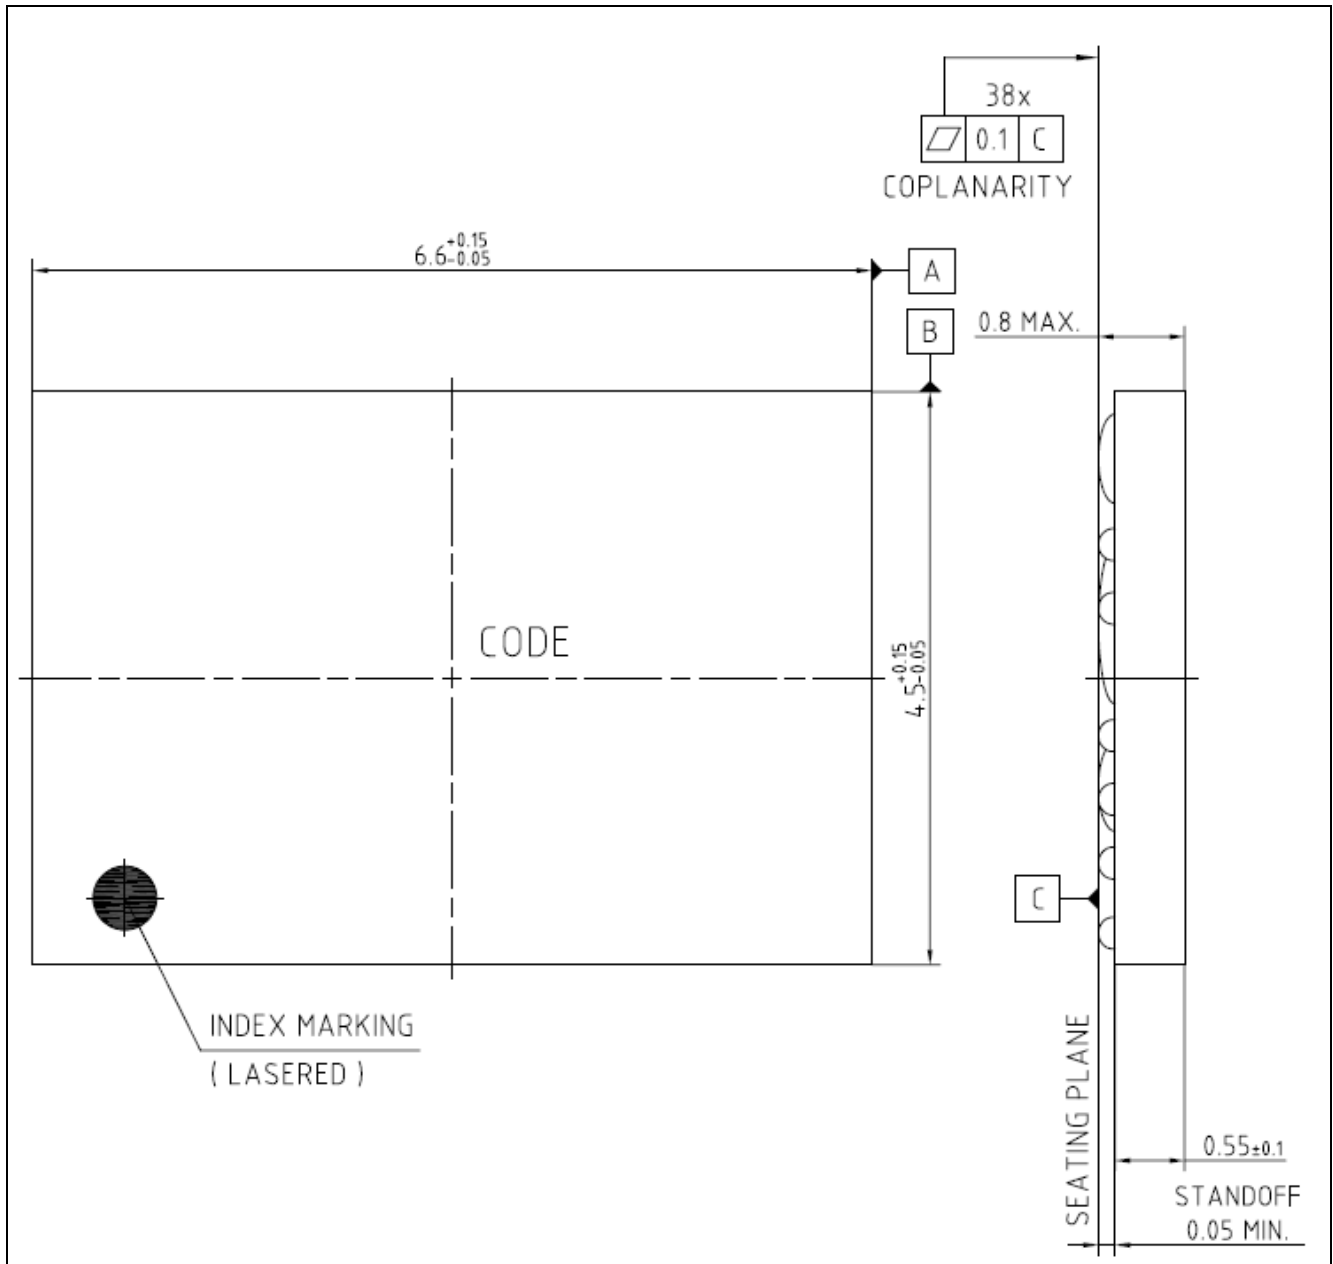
Mechanical Dimensions of Package (Top and Side View) in mm
